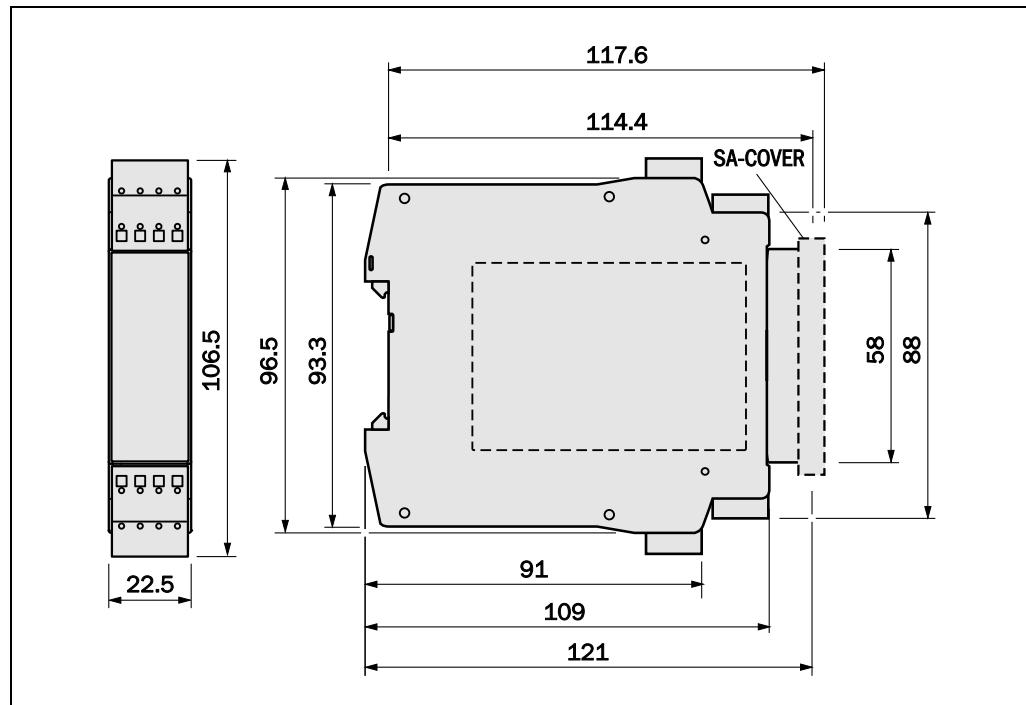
Dimensional drawing variant with spring terminals (mm)
